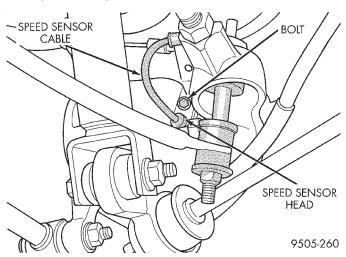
Speed Sensor Head Attachment To Brake Support Plate
